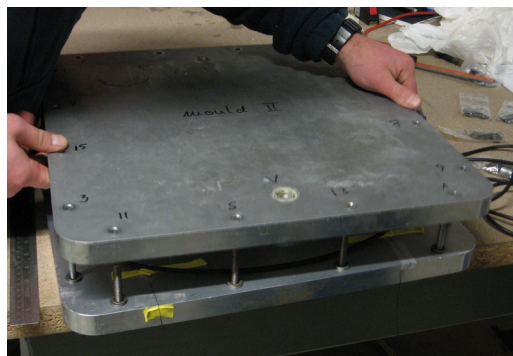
Double-sided VARTM mould for specimen plate manufacturing
